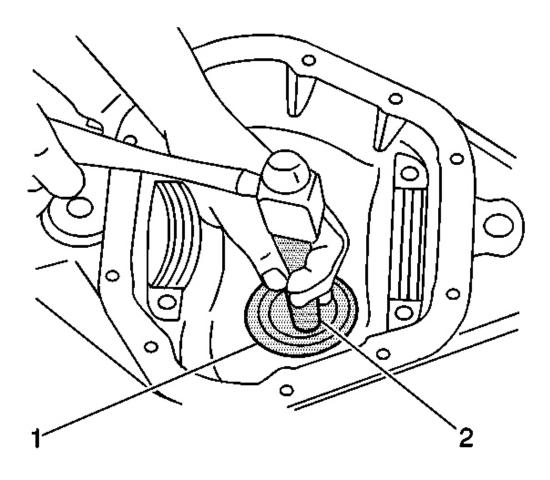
Install The Inner Pinion Bearing Cup Using J 45900, J 22306 Or J 44417 & J 8092
